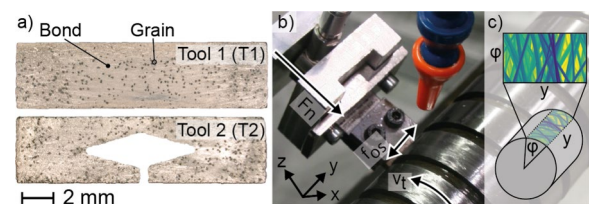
Experimental setup showing a the tool designs (T1 and T2), b the process kinematic (oscillation frequency f_{os} ; workpiece velocity v_t ; pneumatically realised normal force F_n) and c the model of the workpiece using cylindrical projection
